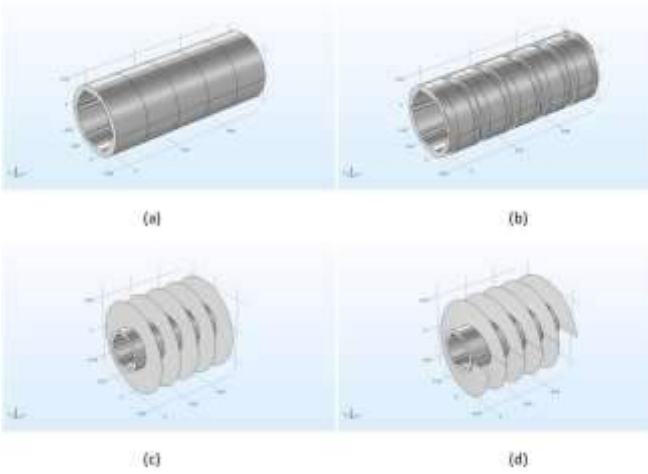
The outer part of the cooling finned pipe; a) grooved straight pipe, b) helical grooves, c) disc-stack blades, d) helical blades
